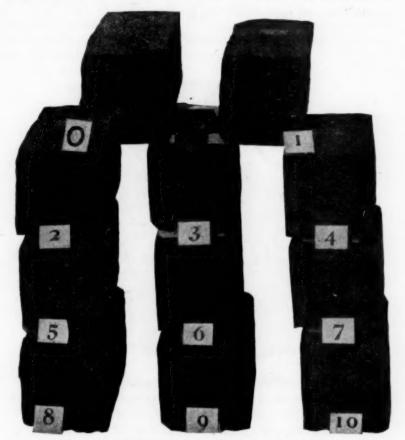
FRACTURED SURFACES OF GREEN SAND TEST BARS
